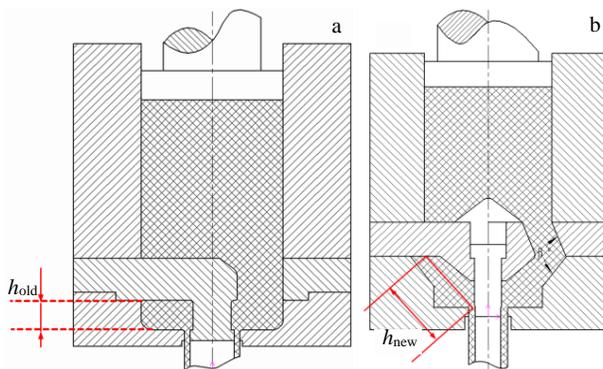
Present porthole extrusion method: (a) traditional extrusion and (b) welding chamber with angle
